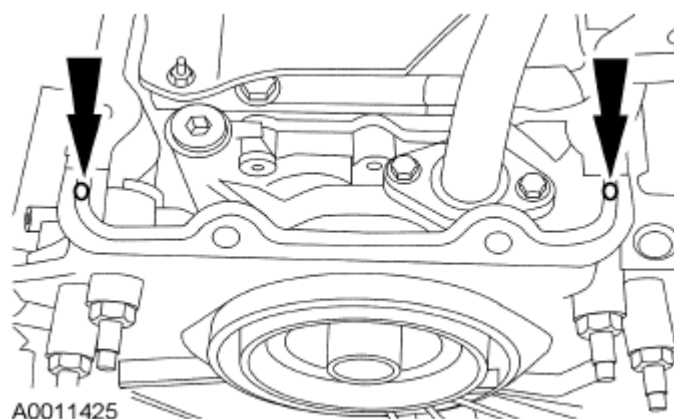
Applying Silicone Gasket And Sealant To Front Cover-To-Cylinder Block Sealing Surface
